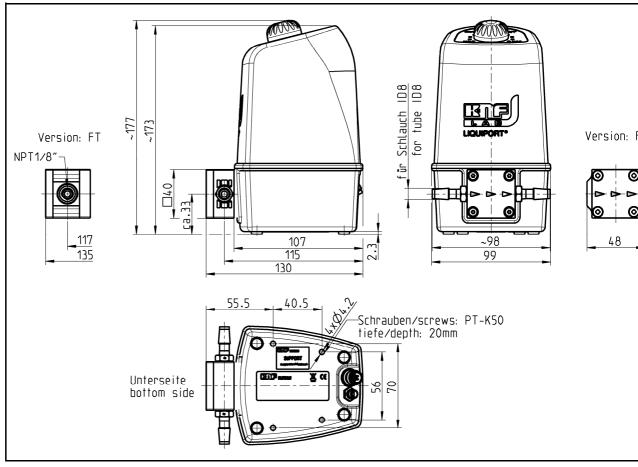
Mounting dimensions for Liquiport[®] 100 / Liquiport[®] 1.100 (dimension tolerances as per DIN ISO 2768-1, tolerance class V)
